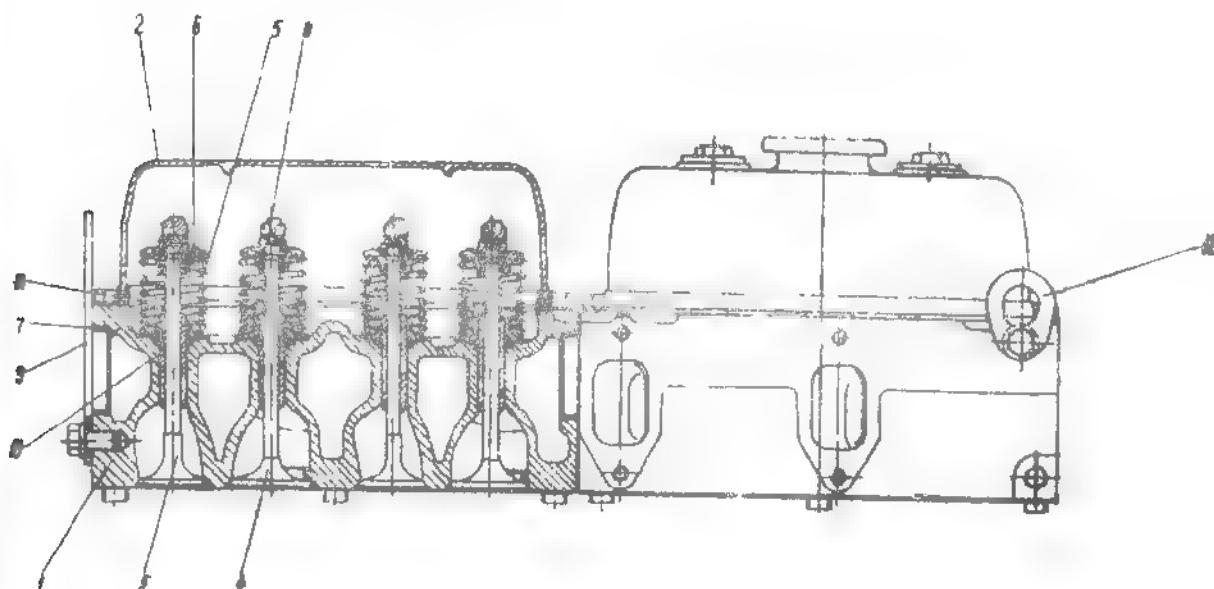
CYLINDER HEAD LONGITUDINAL SECTION
